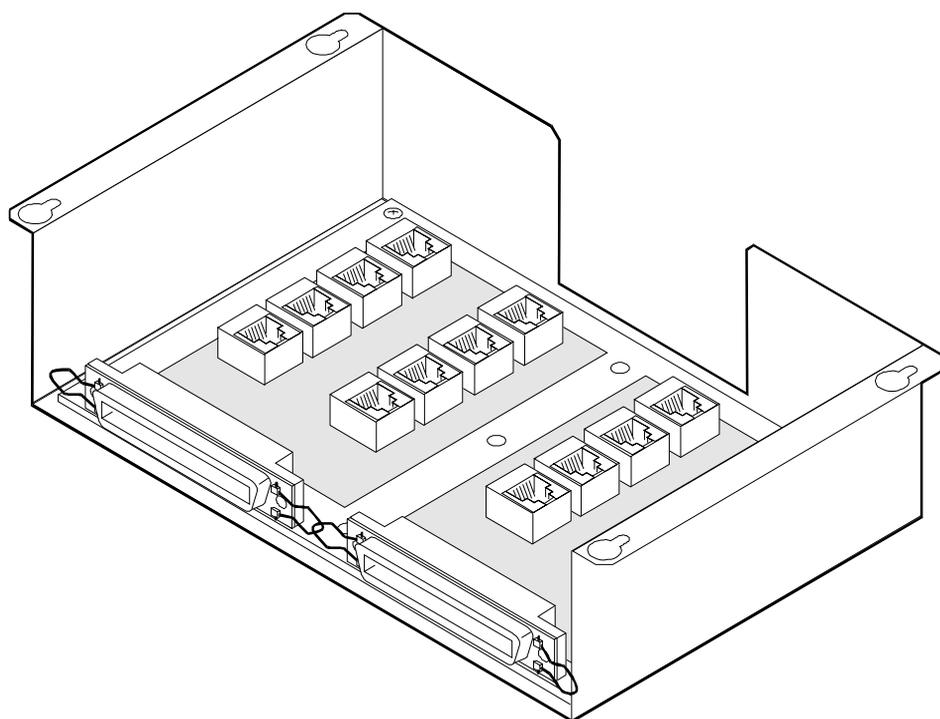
MAP/100C Tip/Ring Distribution Panel Assembly Mounted inside a Larger Cover
